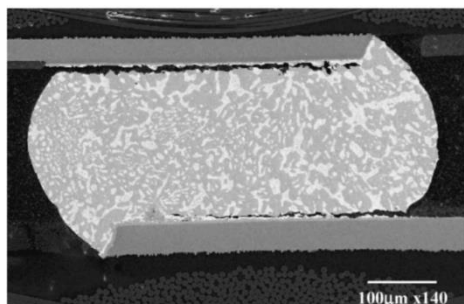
Illustration of interfacial crack propagation between the PCB board and solder joints [23]
